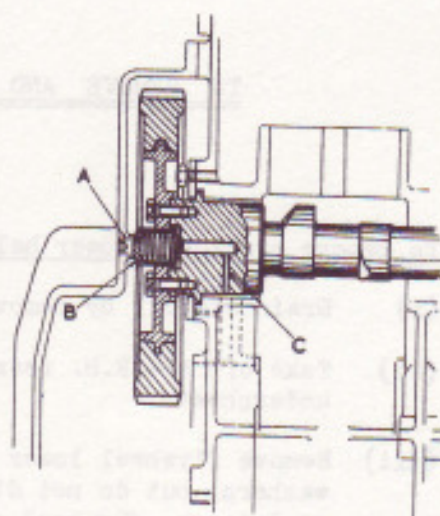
OILWAYS LUBRICATING CAMSHAFT THRUST BUTTON.
